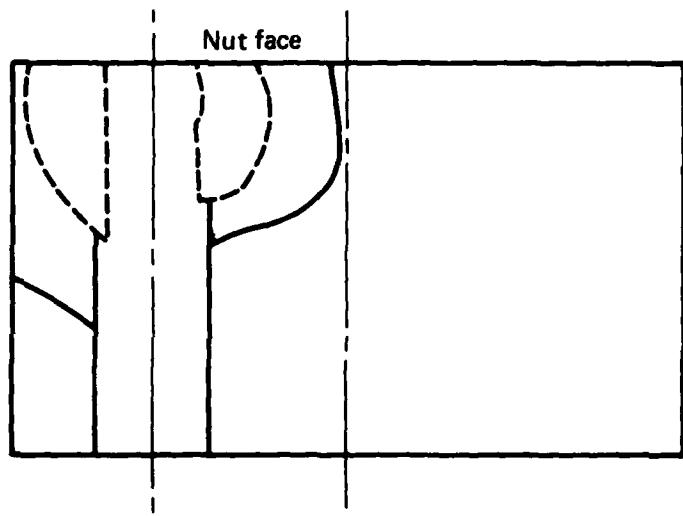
(c) FRACTURE SURFACES: SPECIMEN TYPE (C)
